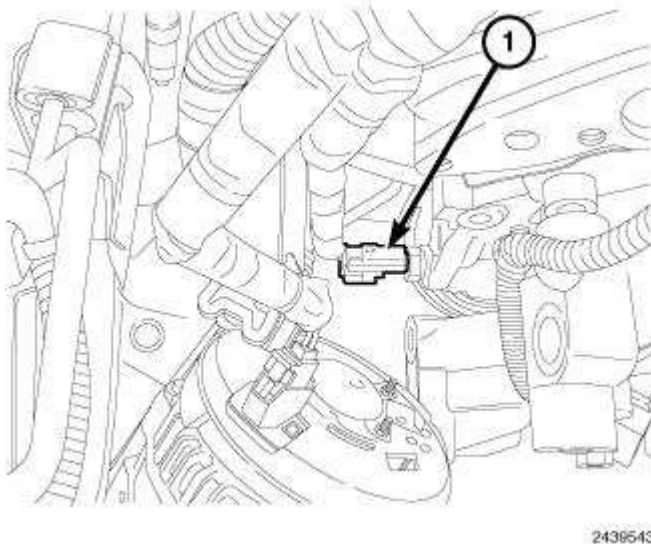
Identifying Oil Temperature Sensor Electrical Connector
